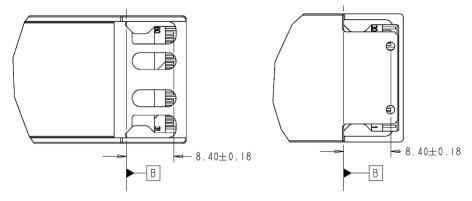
OSFP, signal pad location relative to module (left: top view, right: bottom view)
